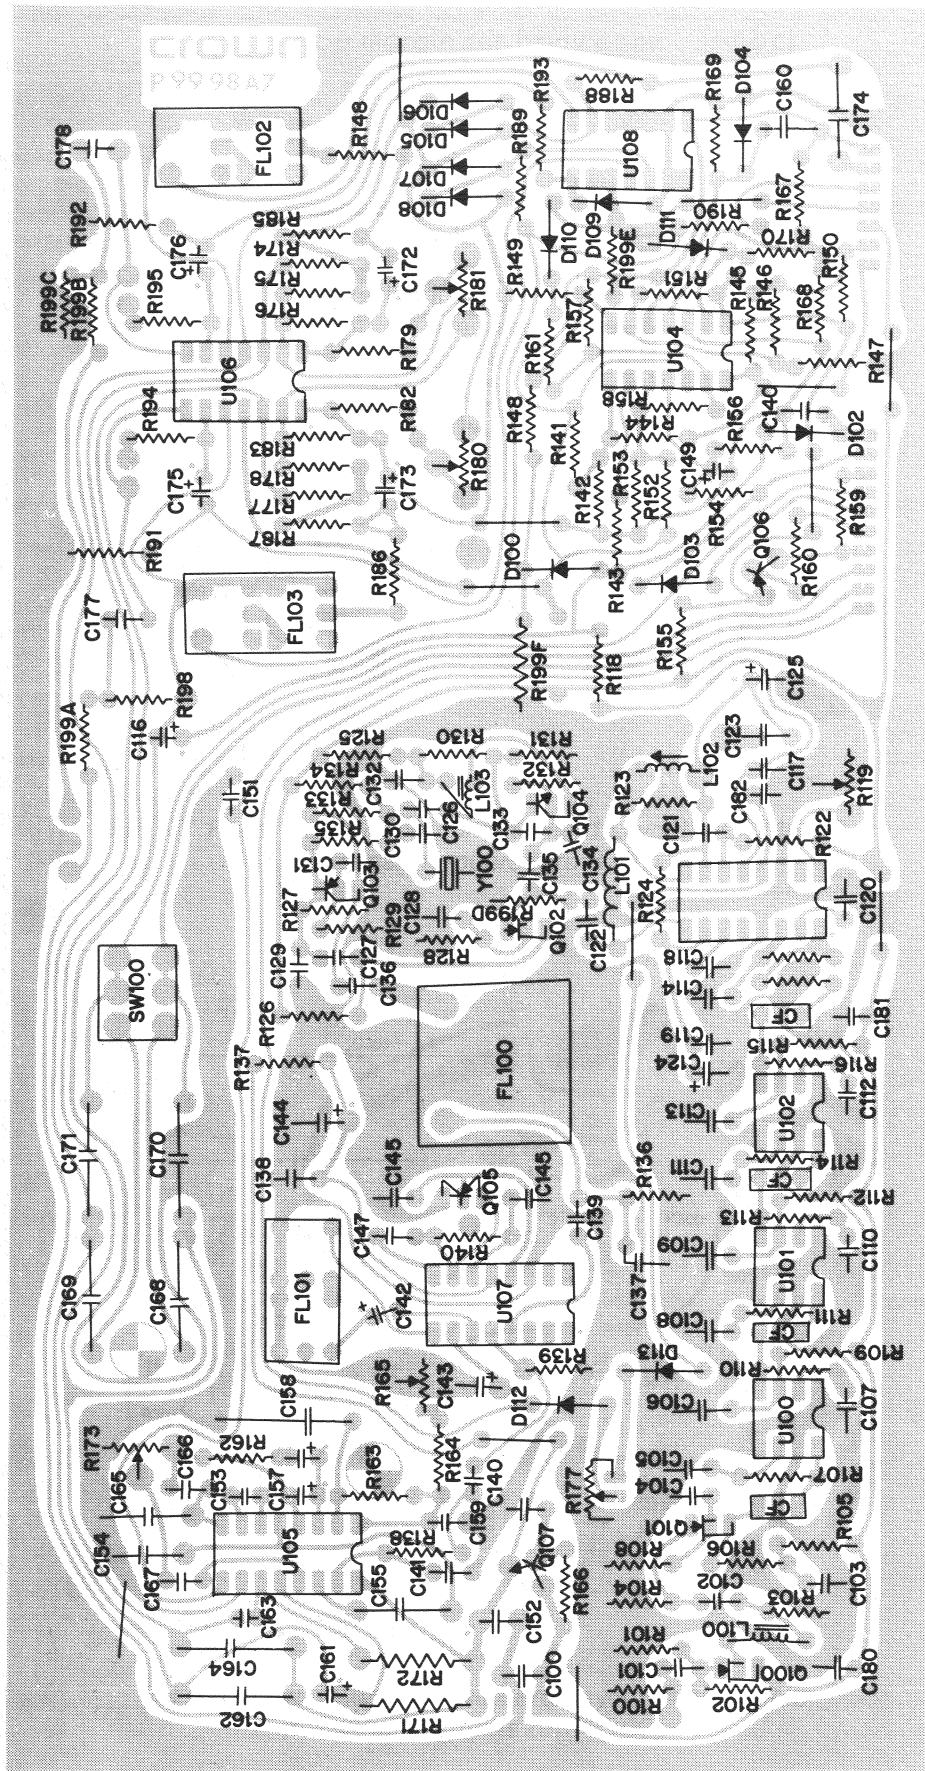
Main Module Foil Board Layout; #Q42499-6
